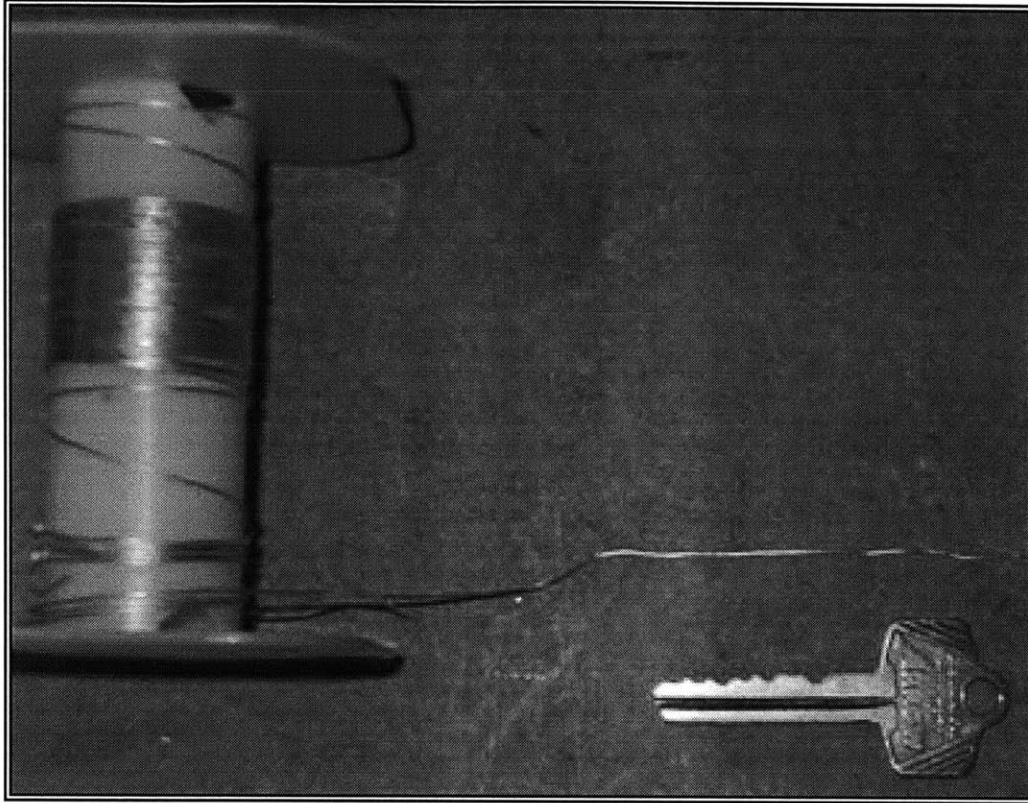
This spool of 0.020-inch diameter Indium wire was manufactured by extrusion.; one standard slug of Indium is enough for many feet of wire
